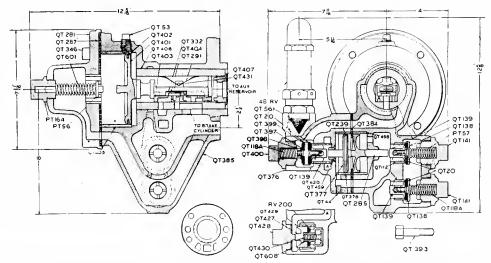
Quick Action Pipeless Triple Valve, J6, Style A with High Emergency Pressure Cap and Safety Valve. Used with 16 and 18 in. Passenger Brake Cylinders.
